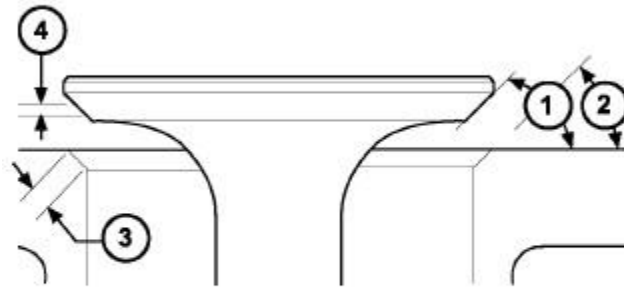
Intake Valve & Exhaust Valve Component Configuration
